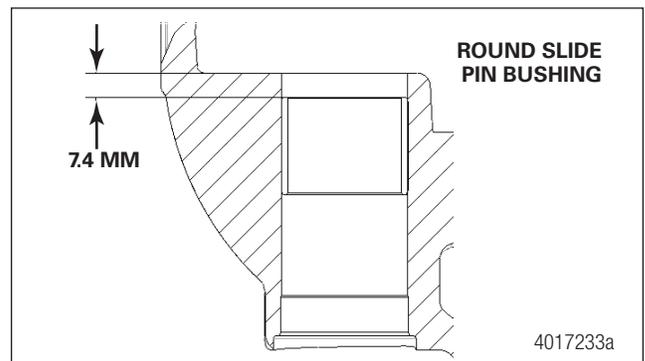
Round Slide Pin Bushing Depth from End Face of Housing
